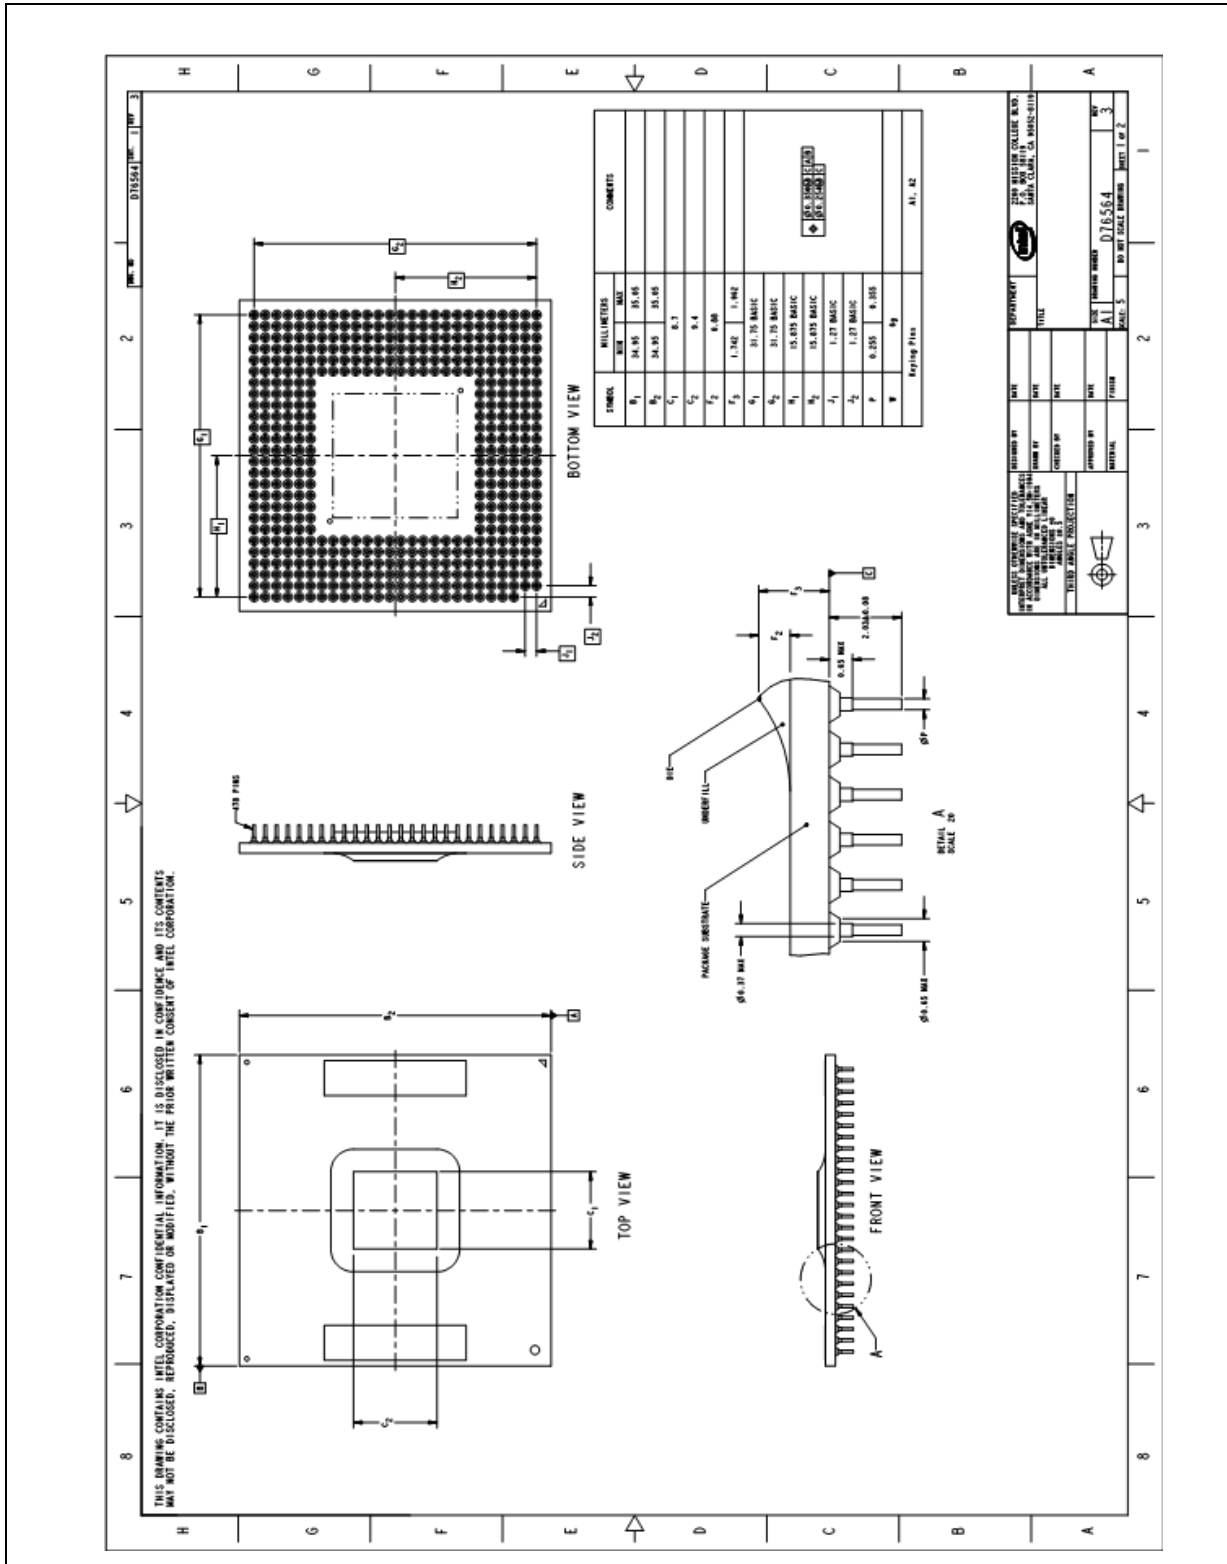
3-MB Micro-FCPGA Processor Package Drawing (Sheet 1 of 2)
